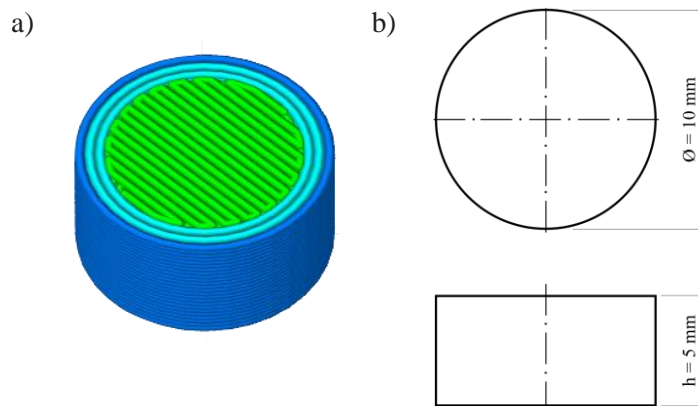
a) 3D model of imported cylinder design and b) dimensions (in mm)
